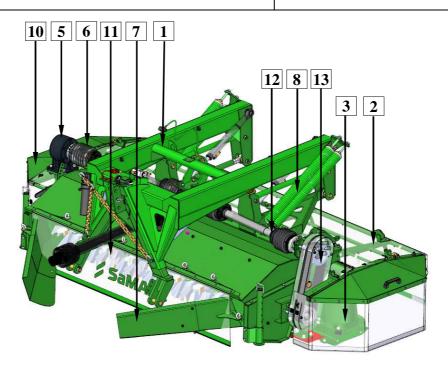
Parts of SaMASZ front disc mower with tine conditioner
